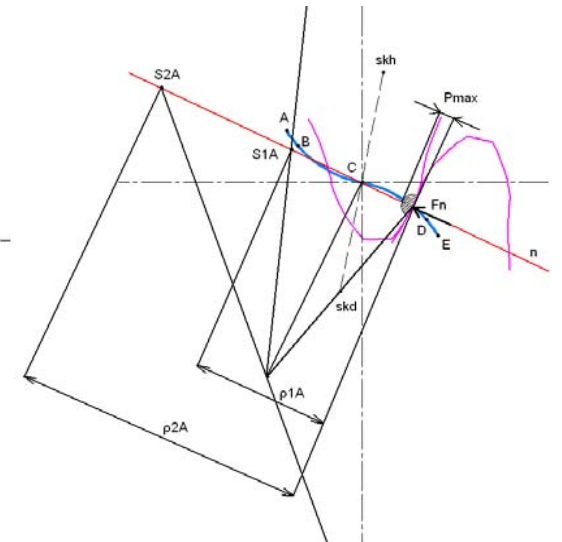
Meshing parameters and radius of curvature for C-C gearing [5]
